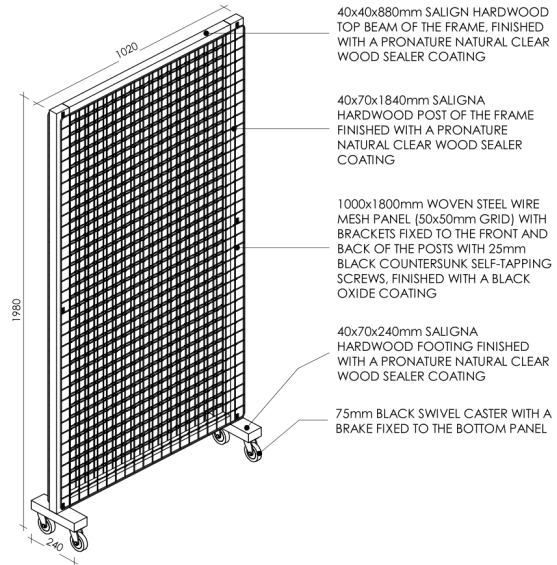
Layout and configuration of Retail units (Author, 2020)
